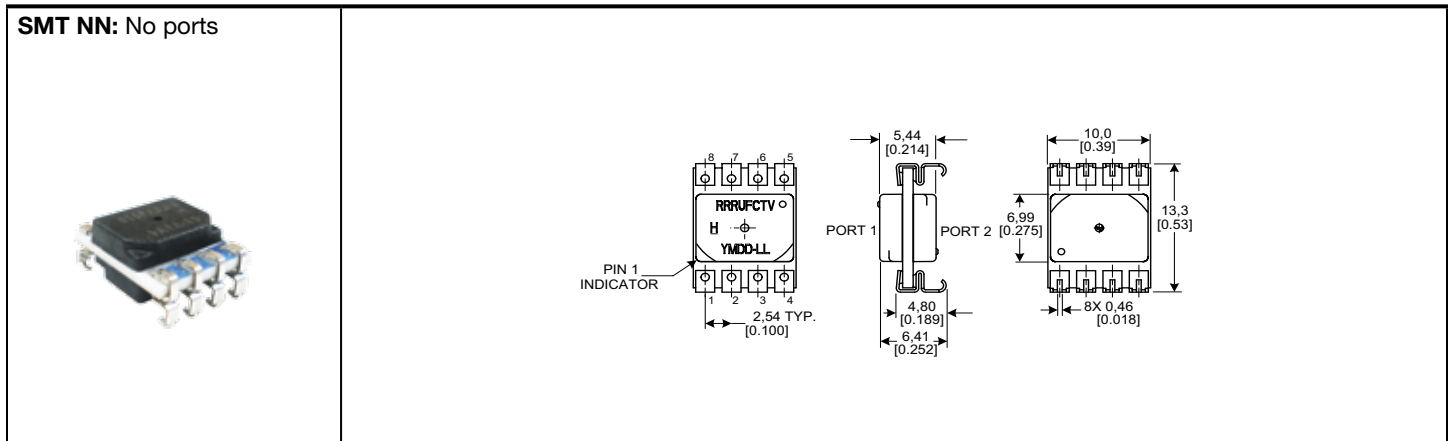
SMT Package Dimensional Drawings (For reference only: mm [in])
